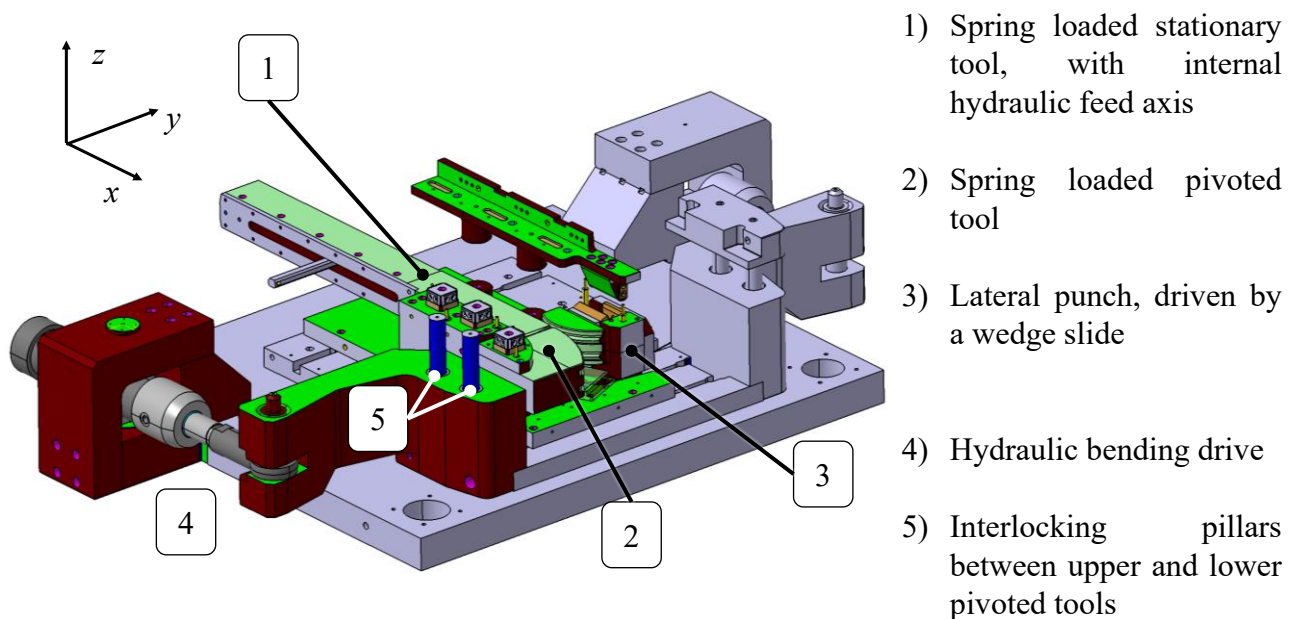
Industrial-scale ISB tool (hidden upper tooling), equipped with the insert for the perpendicular bending plane. Lifted by spring loads, a mandrel (1) holds the profile in the stationary and pivoted (2) part of the tool. An optional punch is driven by a wedge slide (3) to form stiffening ribs at the base of the profile during each incremental press stroke. The outer frame stays identical to the tooling of the vertical bending axis.
